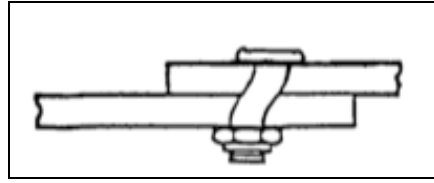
Fastener Shear-Off Failure [9]
